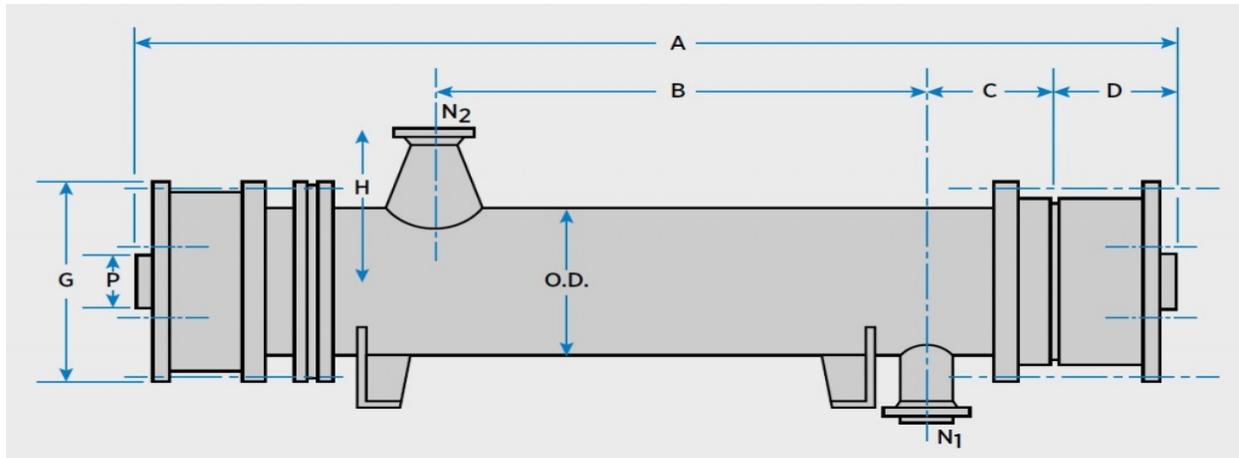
Heat exchanger configuration plan view (Author's sketch).
